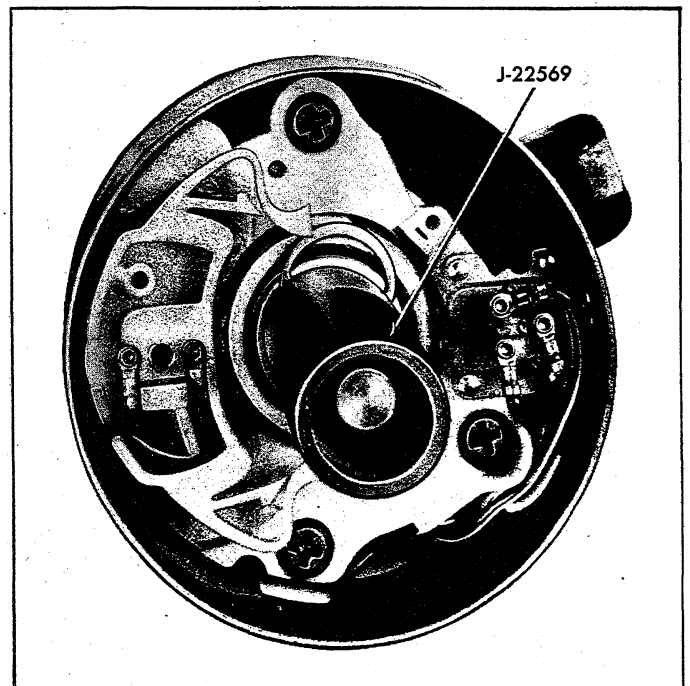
Removing "C" Ring Retainer Using Tool J-22569
